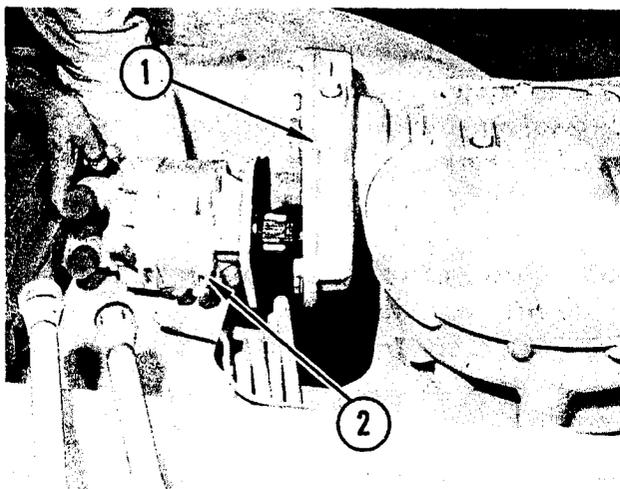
CIRCLE REVERSE HYDRAULIC MOTOR
